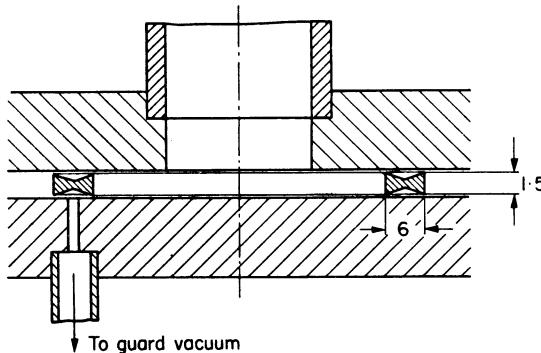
Guard vacuum seal with specially shaped copper gasket. After Heathcote⁵²⁶ (Courtesy of The Institute of Physics and The Physical Society, London)
